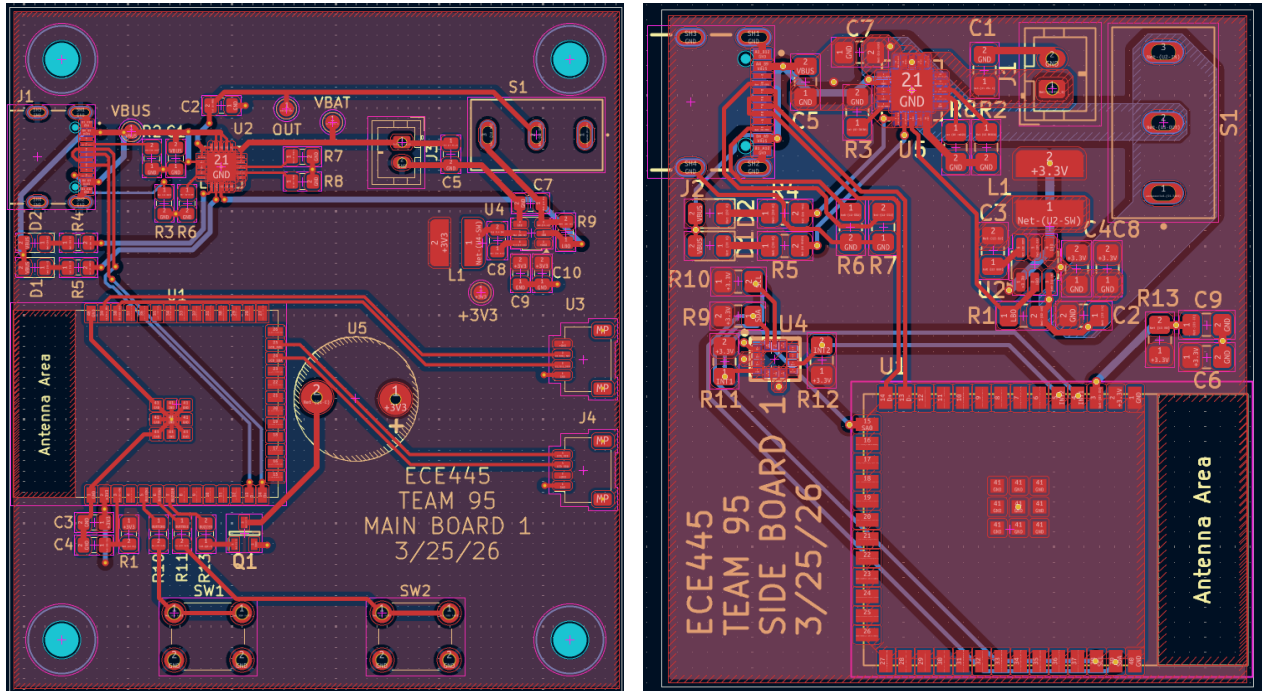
PCB for chair mounted device (left) and PCB for wearable device (right)
